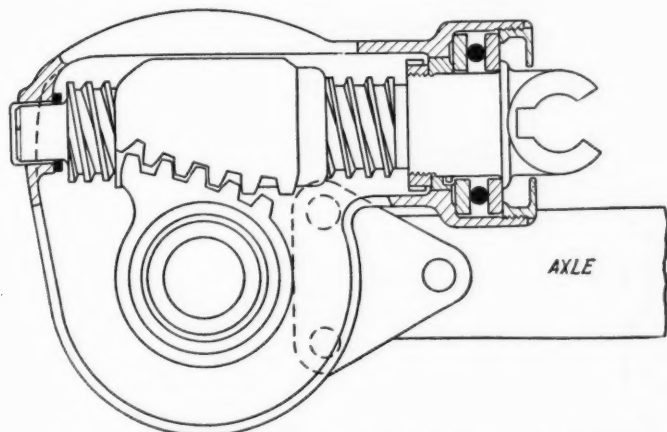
Waseige duplicate steering gear—screw, nut and sector
